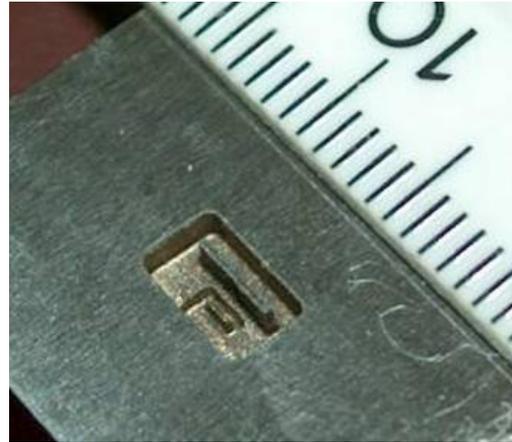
Micro EDM Milling machining with electrode diameter 0.8 and 0.3 mm
